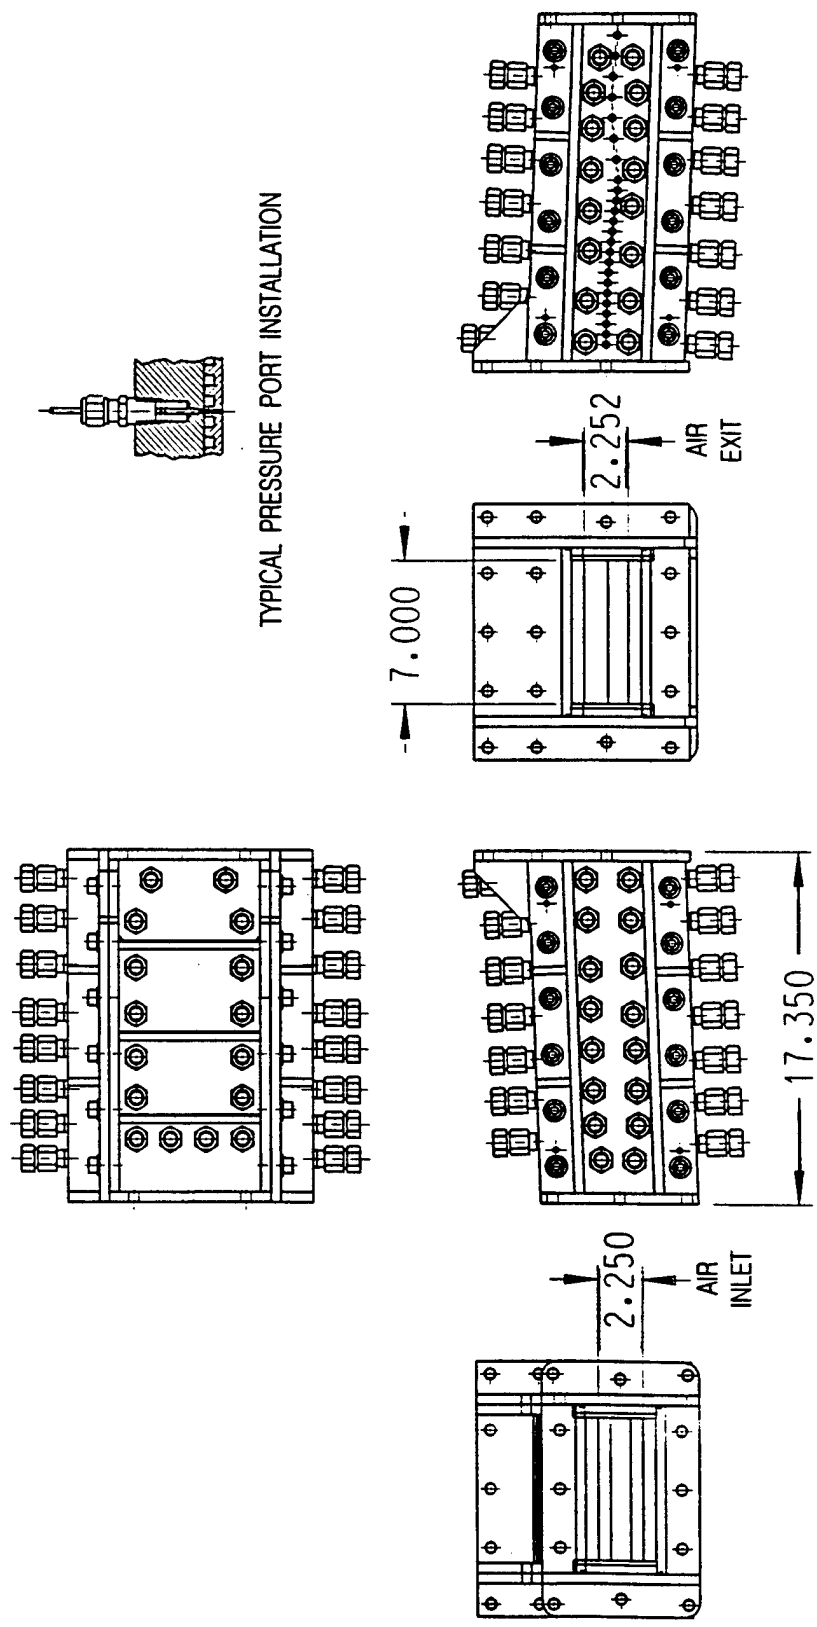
Schematic Diagram of Nozzle Section Showing Flow Channel Dimensions
